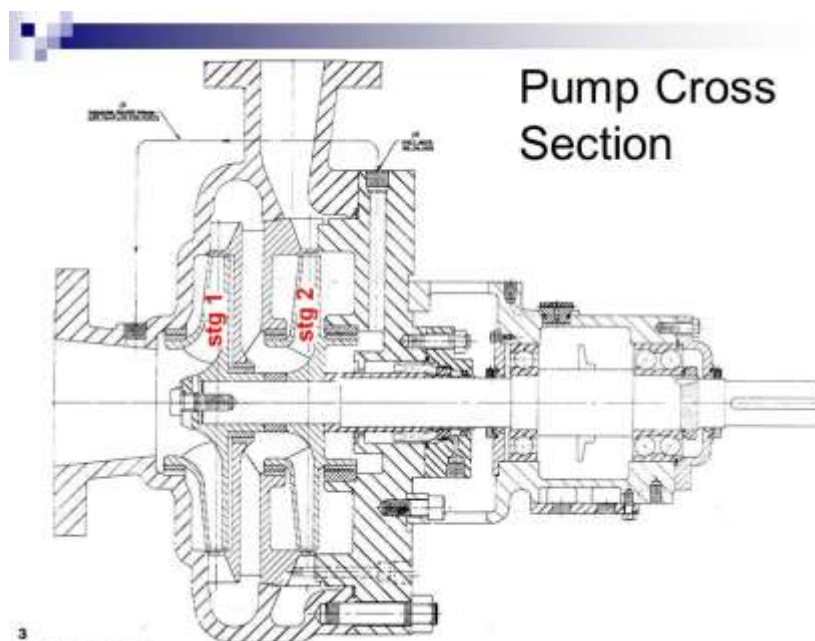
CROSS SECTION OF A TYPICAL TWO STAGE CENTRIFUGAL PUMP.
